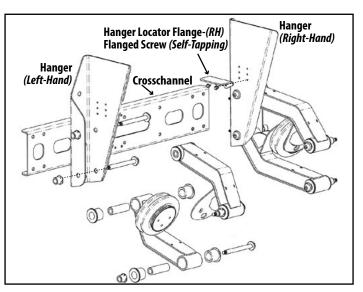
Hanger locator flanges installed to preset ride height-A/SPG mounting plate w/o spacer.
